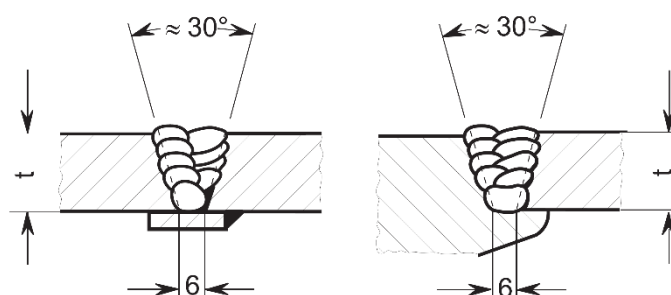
Single-side welds with permanent weld pool supports (backings)
